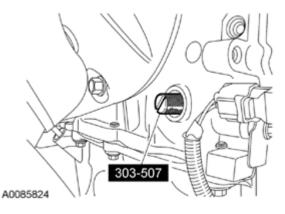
Identifying Crankshaft TDC Timing Peg (303-507) Courtesy of FORD MOTOR CO.
